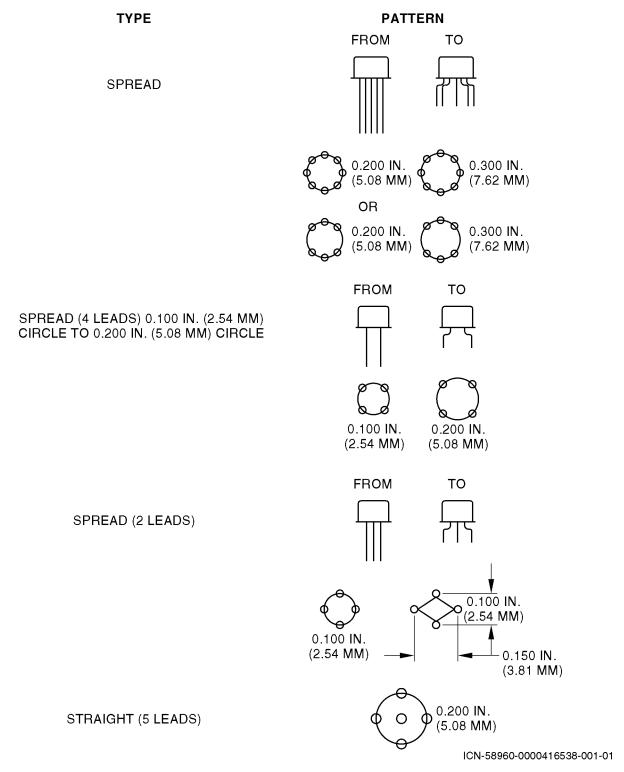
(Sheet 6 of 8) Lead Patterns and Dimensions
